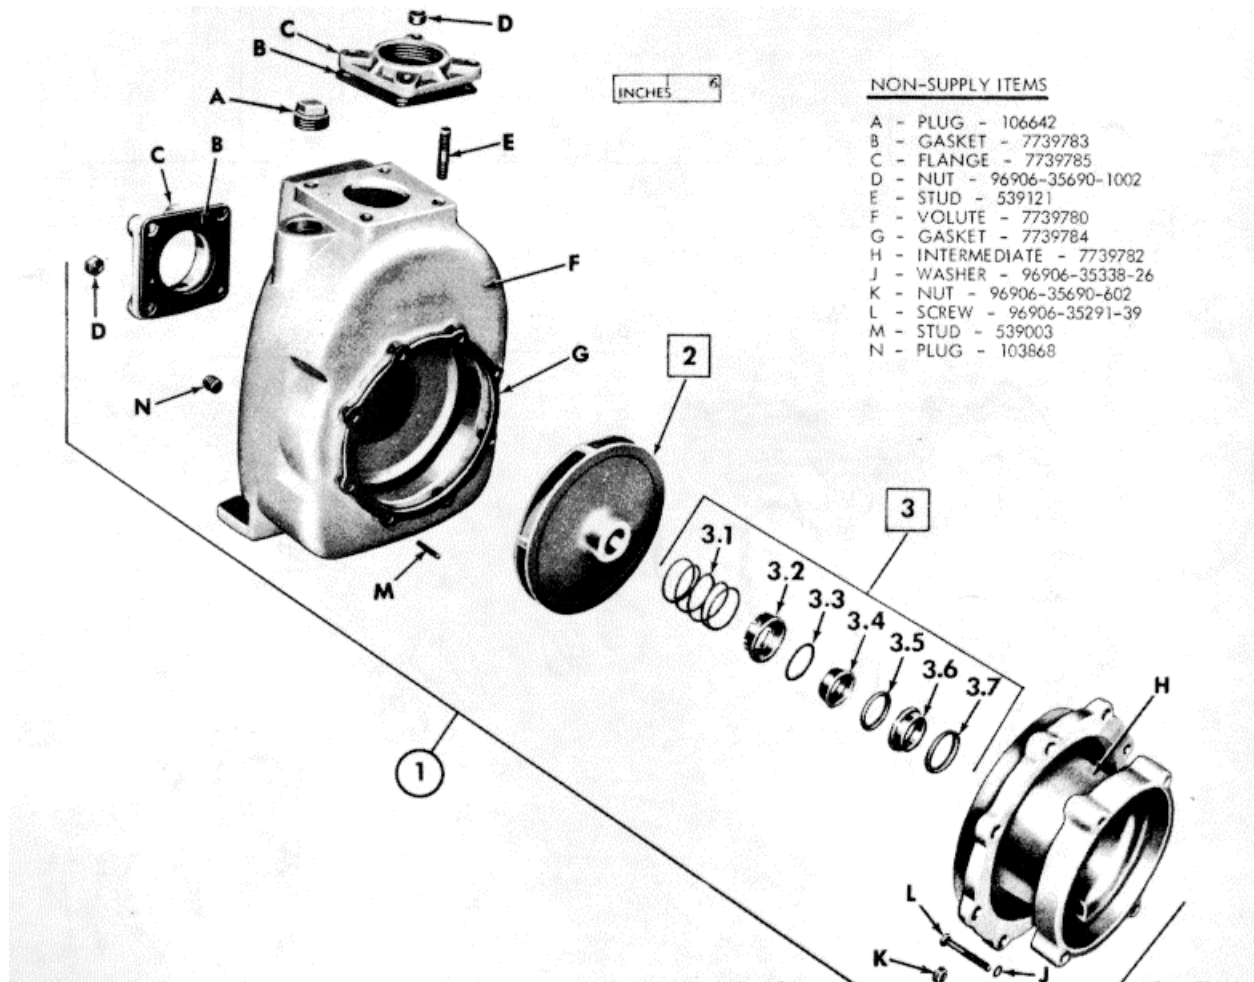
CENTRIFUGAL DISPENSING PUMP-EXPLODED VIEW
